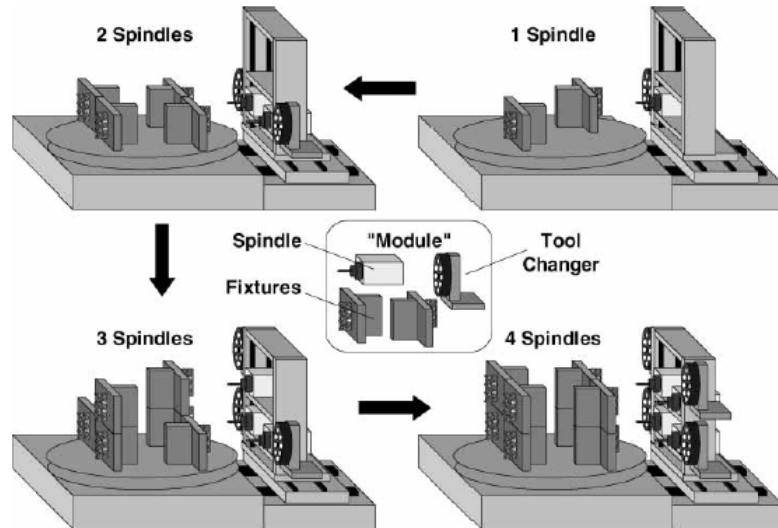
Example of a scalable multi-spindle CNC machine (Spicer et al, 2002).
